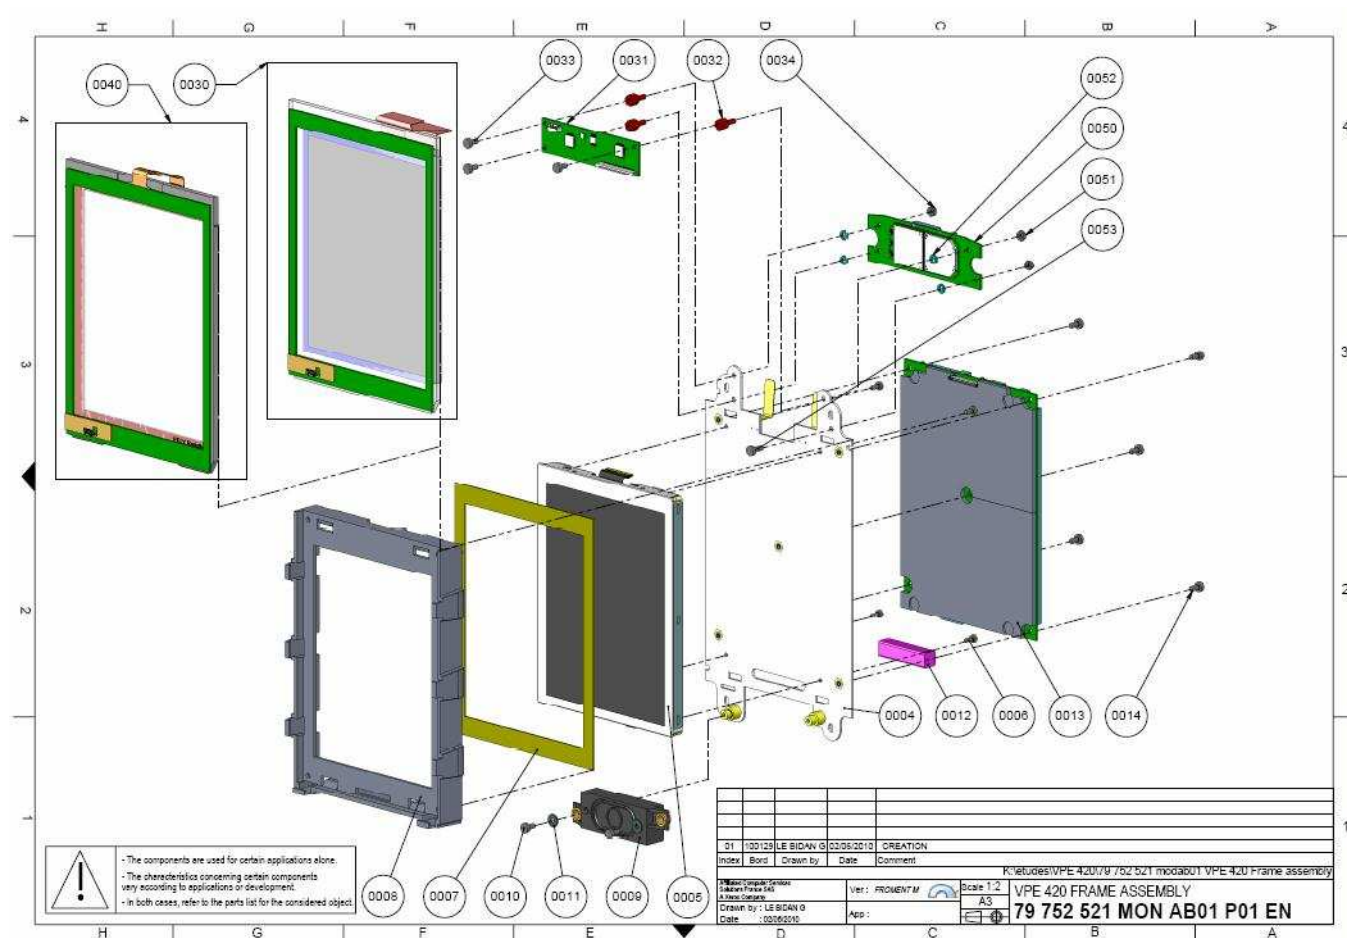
Dismantling/mounting – VPE 420 Frame assembly
